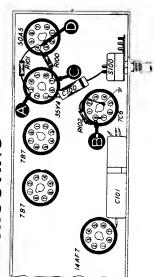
BOTTOM VIEW, SHOWING SECTION 1 TEST POINTS.
